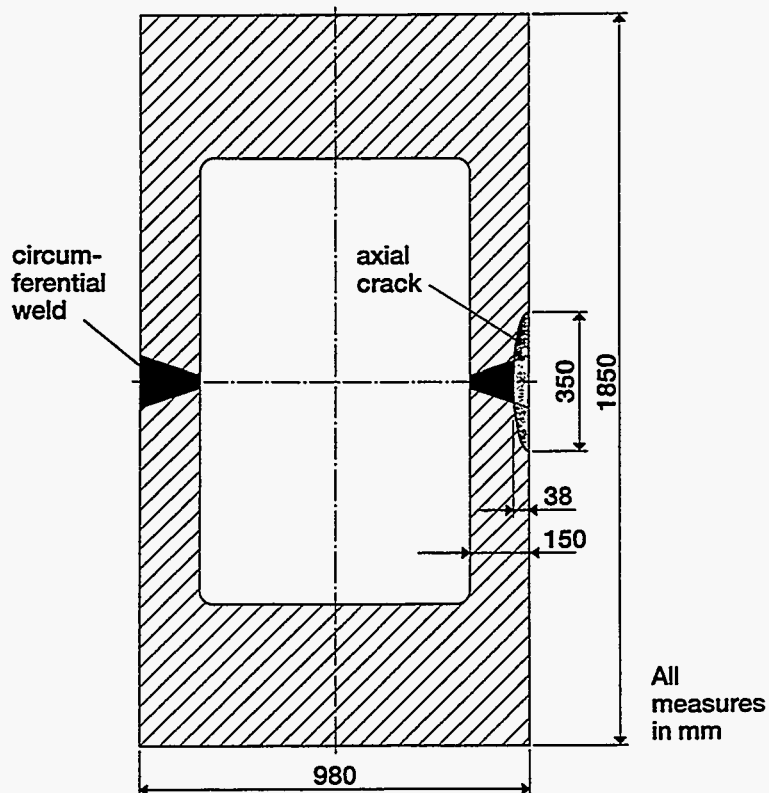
Specimen and crack geometry used in PTS-I/6 experiment
